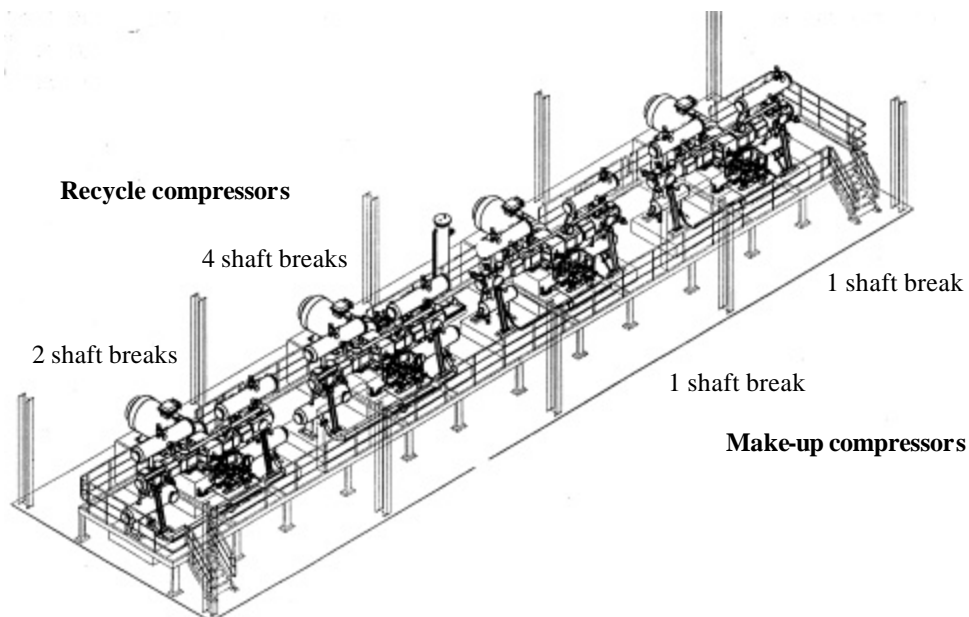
Shaft breaks on the compressor drives on the HDS plant in an oil refinery
